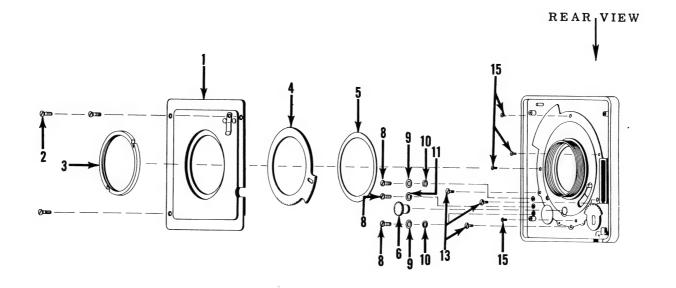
SHUTTER ASSEMBLY - FIRST (Model 2A)
